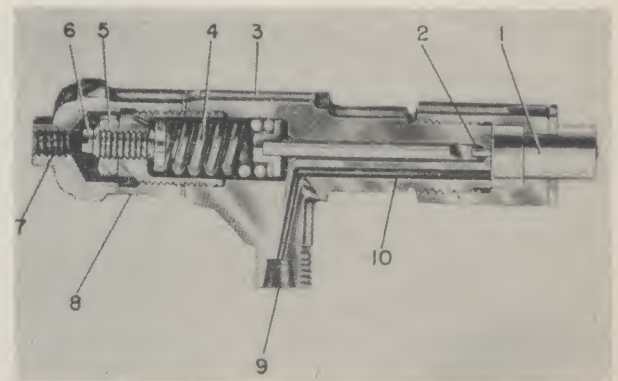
Sectional view of the closed pintle type nozzle used on the Oliver Diesel engines. Nozzle opening pressure of 1750 psi is controlled by adjusting screw (6).
